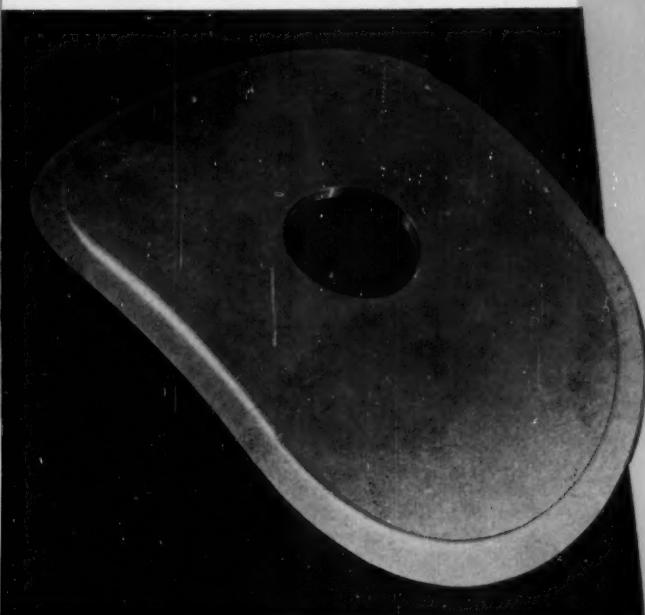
Aircraft door was changed from aluminum casting to chemically milled part to save weight. Part is $\frac{1}{2}$ -in. thick plate, roll formed before milling. Web thickness after milling is 0.150-in. Cost is approximately same as machined casting.
